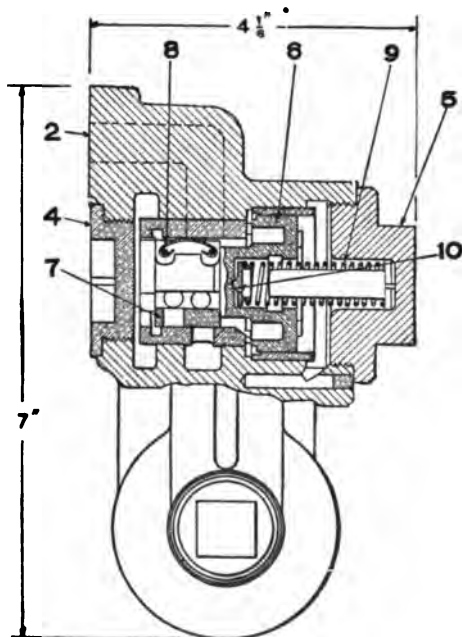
SEC. 10gg.—Feed valve, actual through slide valve.
